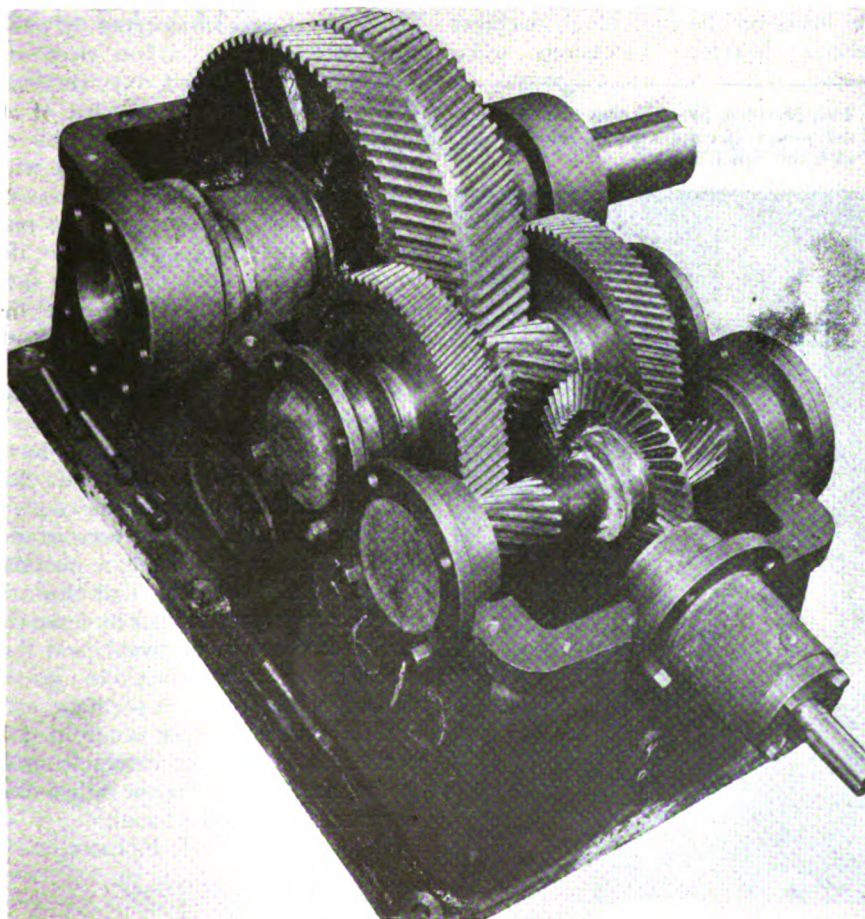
Combination spiral bevel and double herringbone gear speed reducer.
